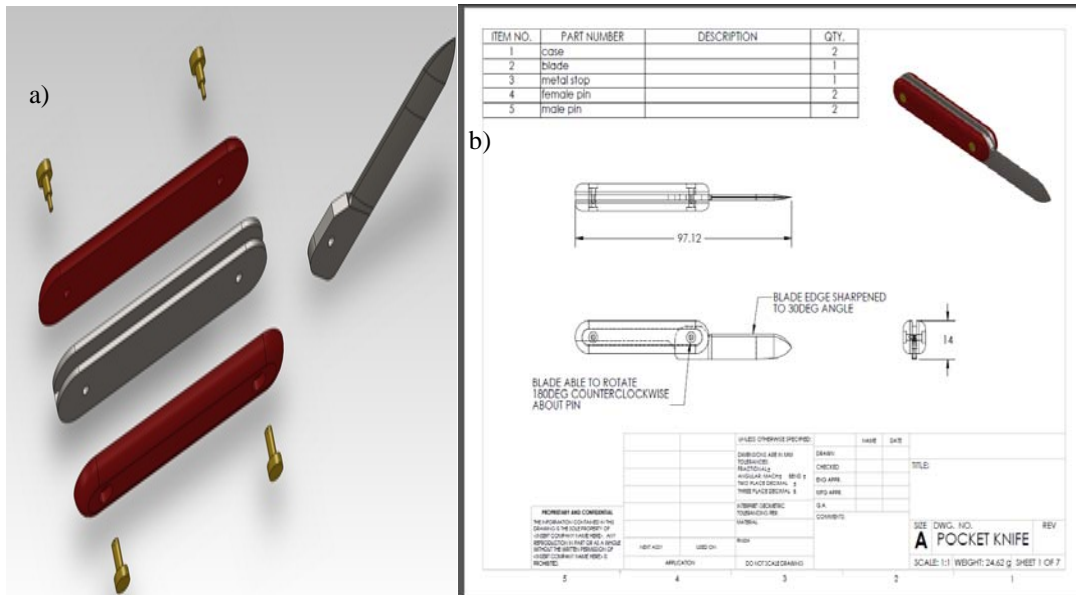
Module Four a) in-class pocket knife assembly tutorial and b) drawing file tutorial.
